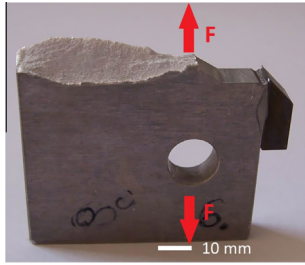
Illustration of typical ductile fracture path of aluminum alloy sheet loaded in opening mode.
